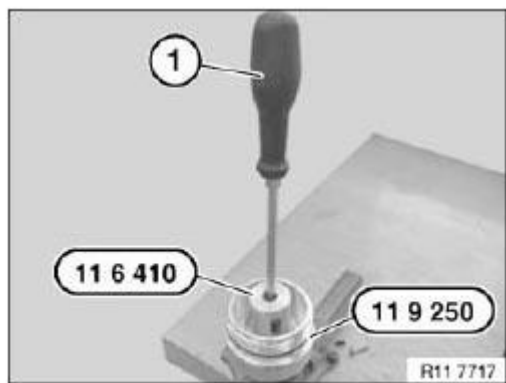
Identifying Screwdriver With Special Tools (11 6 410 And 11 9 250)
